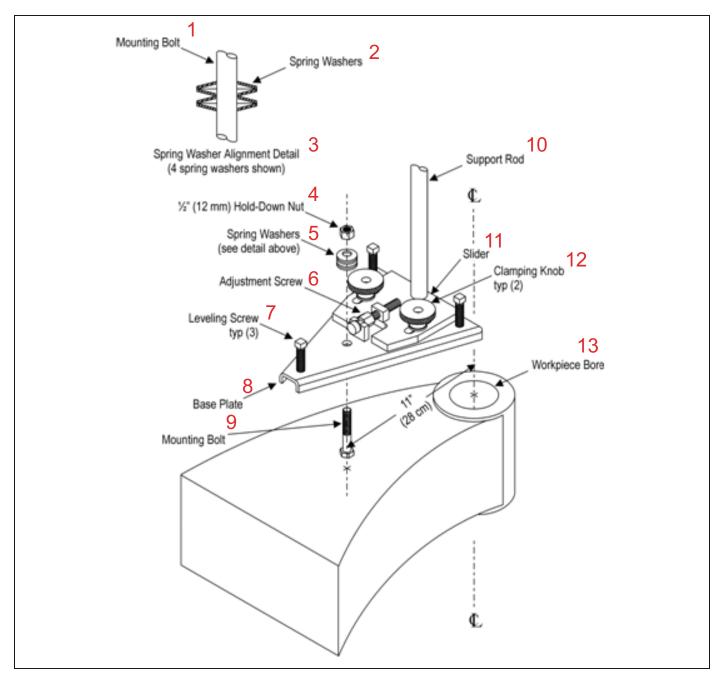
ASSEMBLY ON THE ADJUSTABLE BASE
